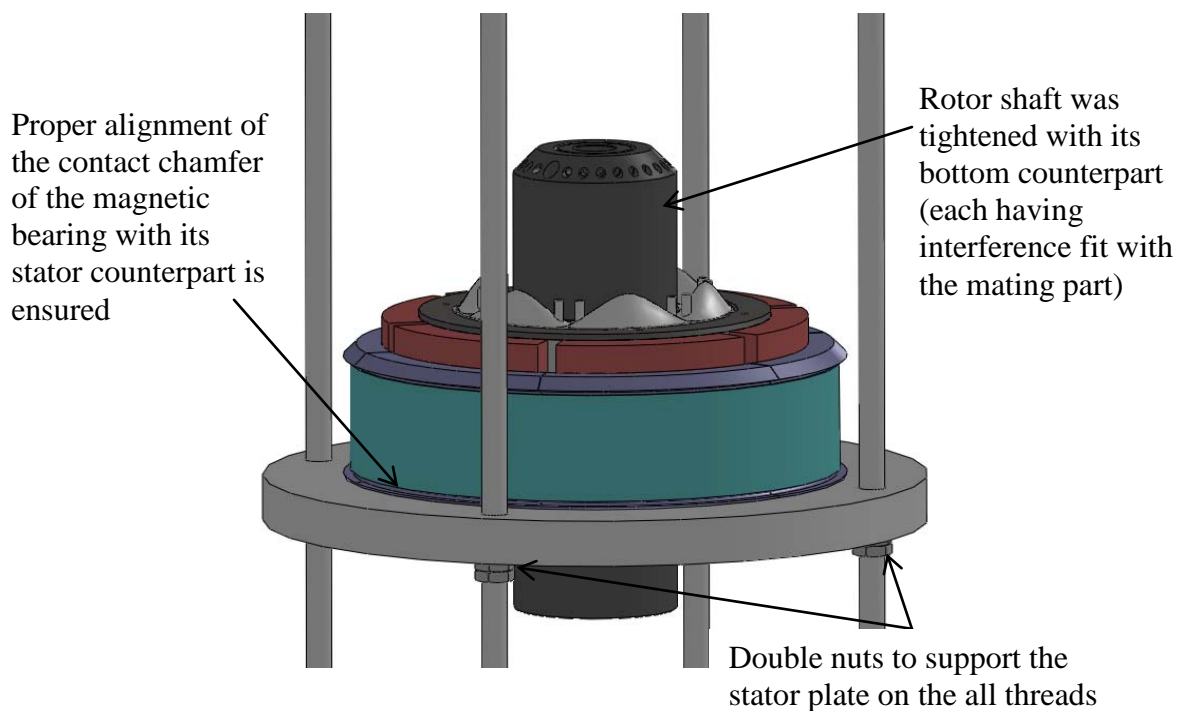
Radial magnetic bearing with its sandwich (or stator plate) placed on double nuts with the cylinder test rig (not shown)
